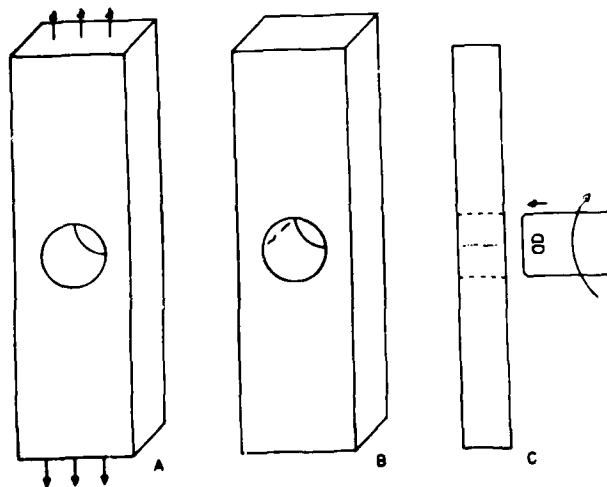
Specimen geometry and probe location. Specimen dimensions, 250 mm by 38 mm by 10 mm.
